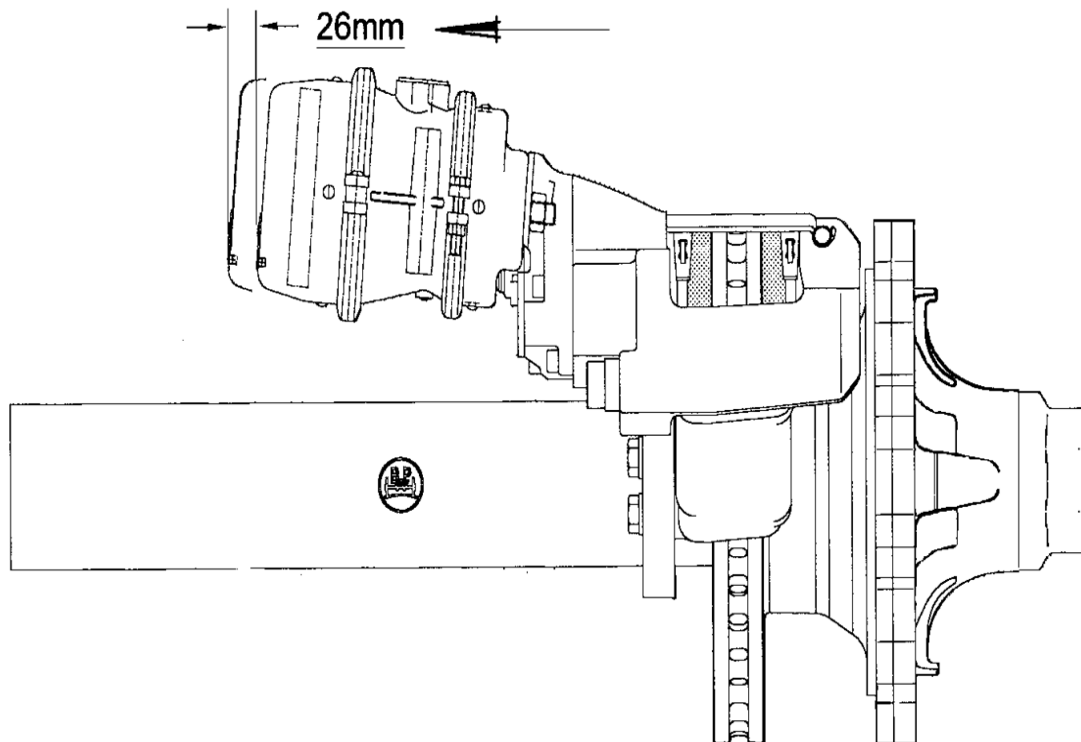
The travel path of the caliper and brake cylinder is 26mm
